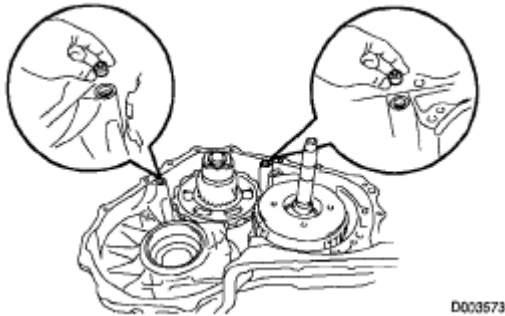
Removing Overdrive Brake Gaskets From Transaxle Case
